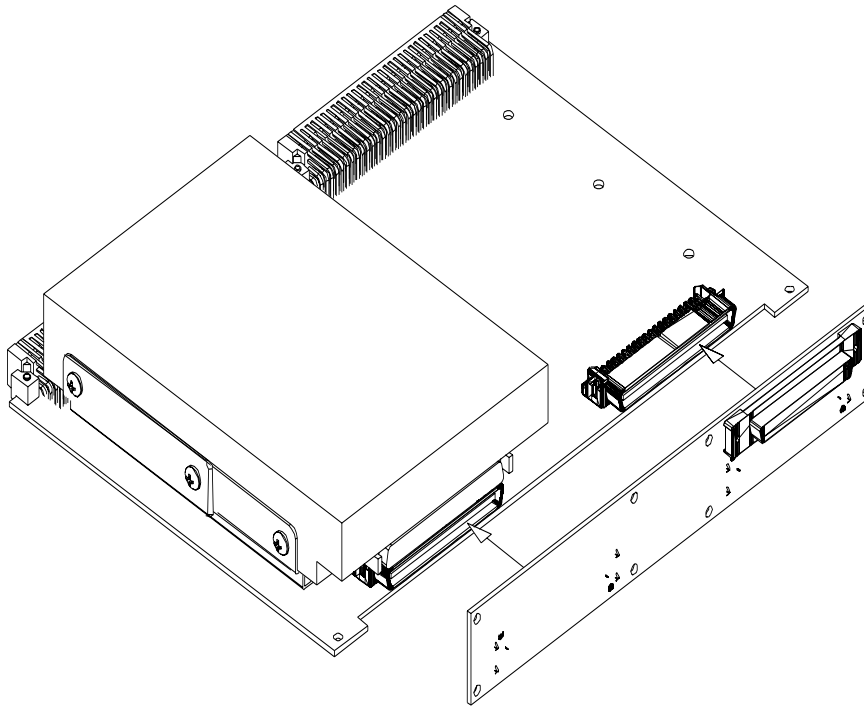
Mating the Daughter Card to the Carrier and One Hard Drive
